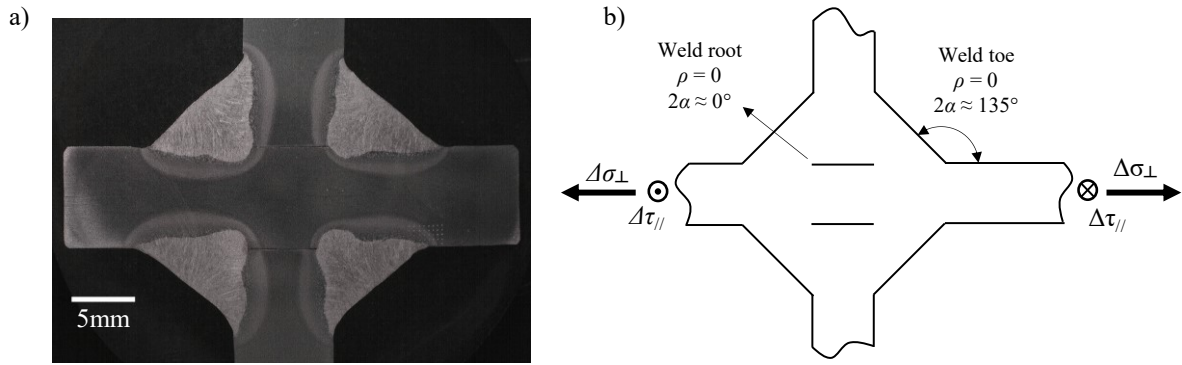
Worst case assumption according to the NSIF-based approach in fatigue design of welded joints. (a) example of a fillet welded joints with double attachments and (b) corresponding geometrical model. Typically, the sharp V-notch opening angles are $2\alpha \approx 0^\circ$ for the weld root and $2\alpha \approx 135^\circ$ for the weld toe.
